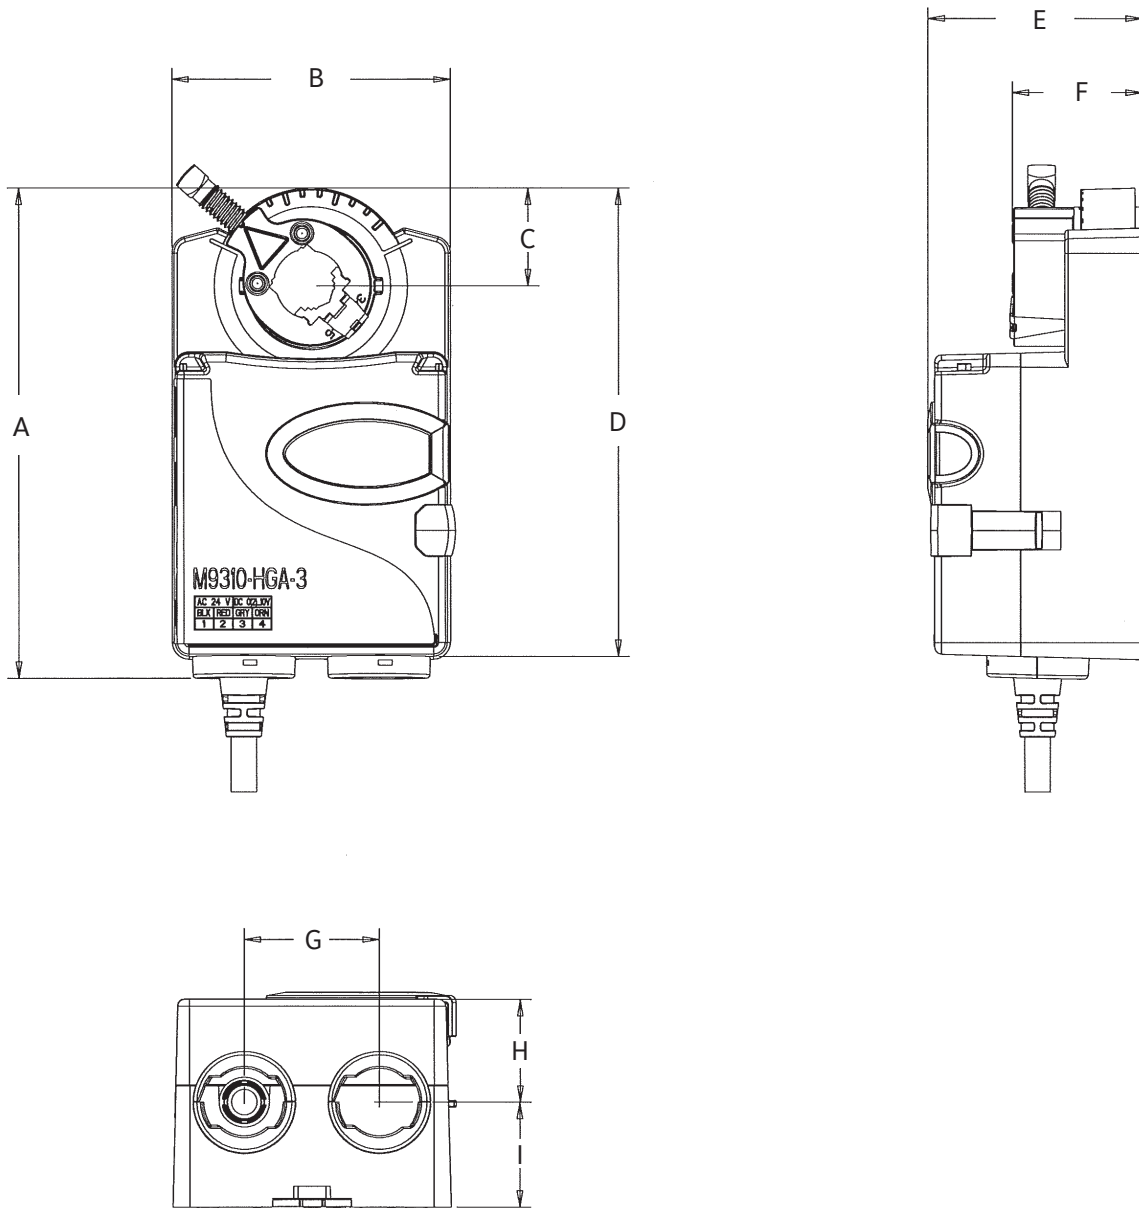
M9310-HGA-3 Dimensions (without accessory kit)
